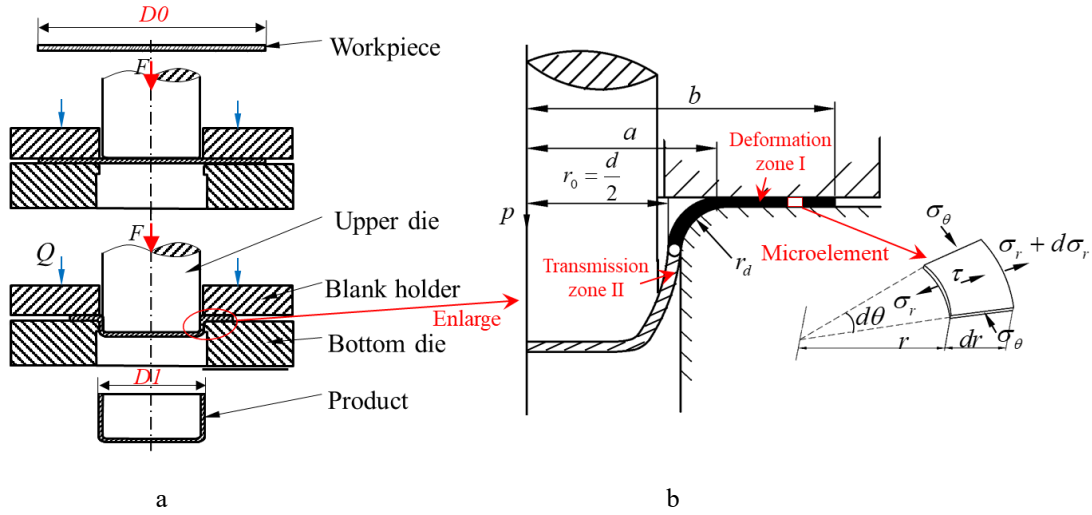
Deformation of sheet drawing: a – sheet drawing process, b – stress state
